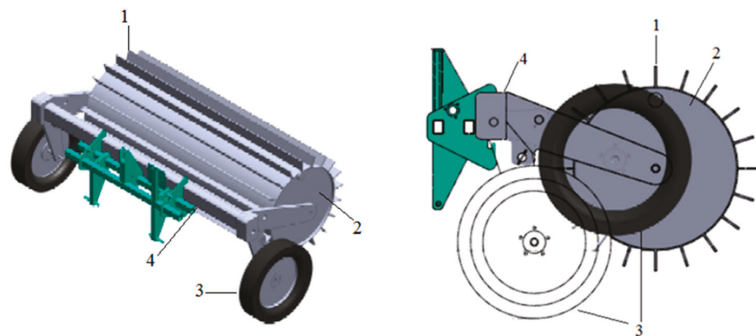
Design images of the stubble cutter prototype ((1) Stubble cutter blades; (2) Cylinder chassis; (3) Road condition wheel; (4) Main carrier chassis).
